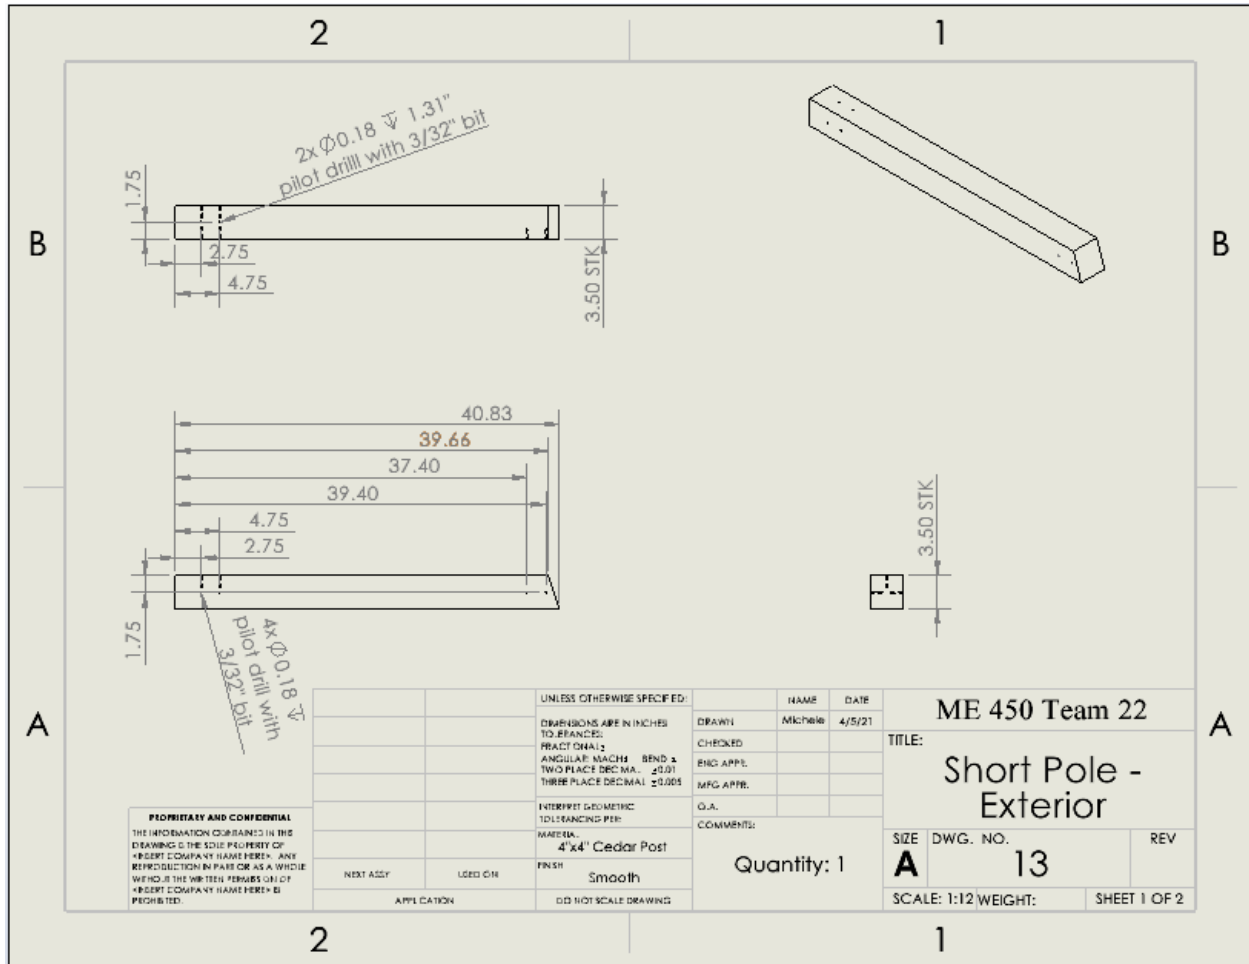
Engineering Drawing of the Short Pole - Exterior.
